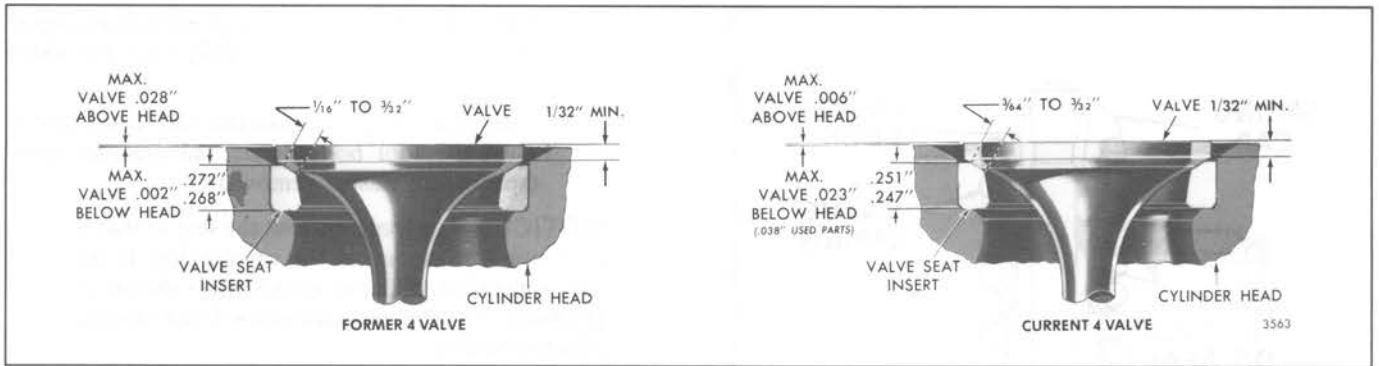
Exhaust Valve Protrusion Beyond Cylinder Head
